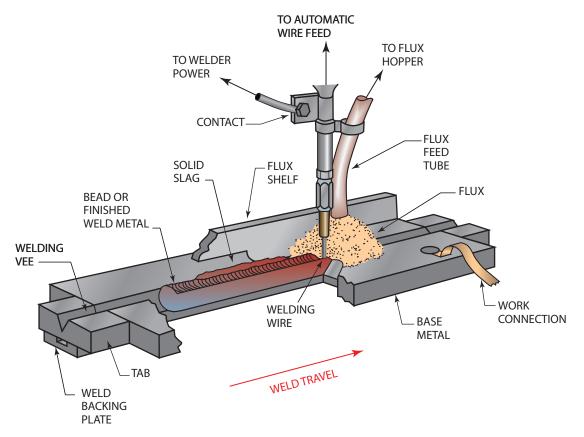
Schematic of a SAW setup in which the work is moved past the welding gun.
